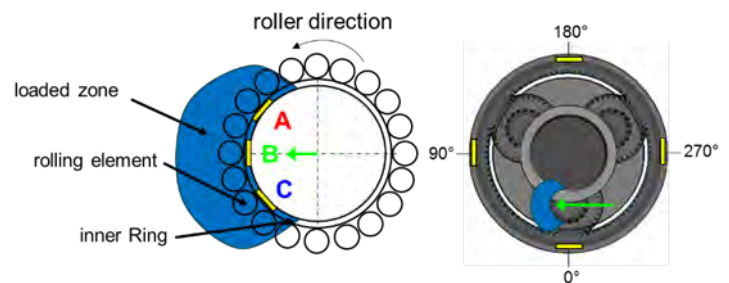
Measurement positions A, B and C at the planetary bearing inner ring (left) and circumferential ring gear angle (right)
